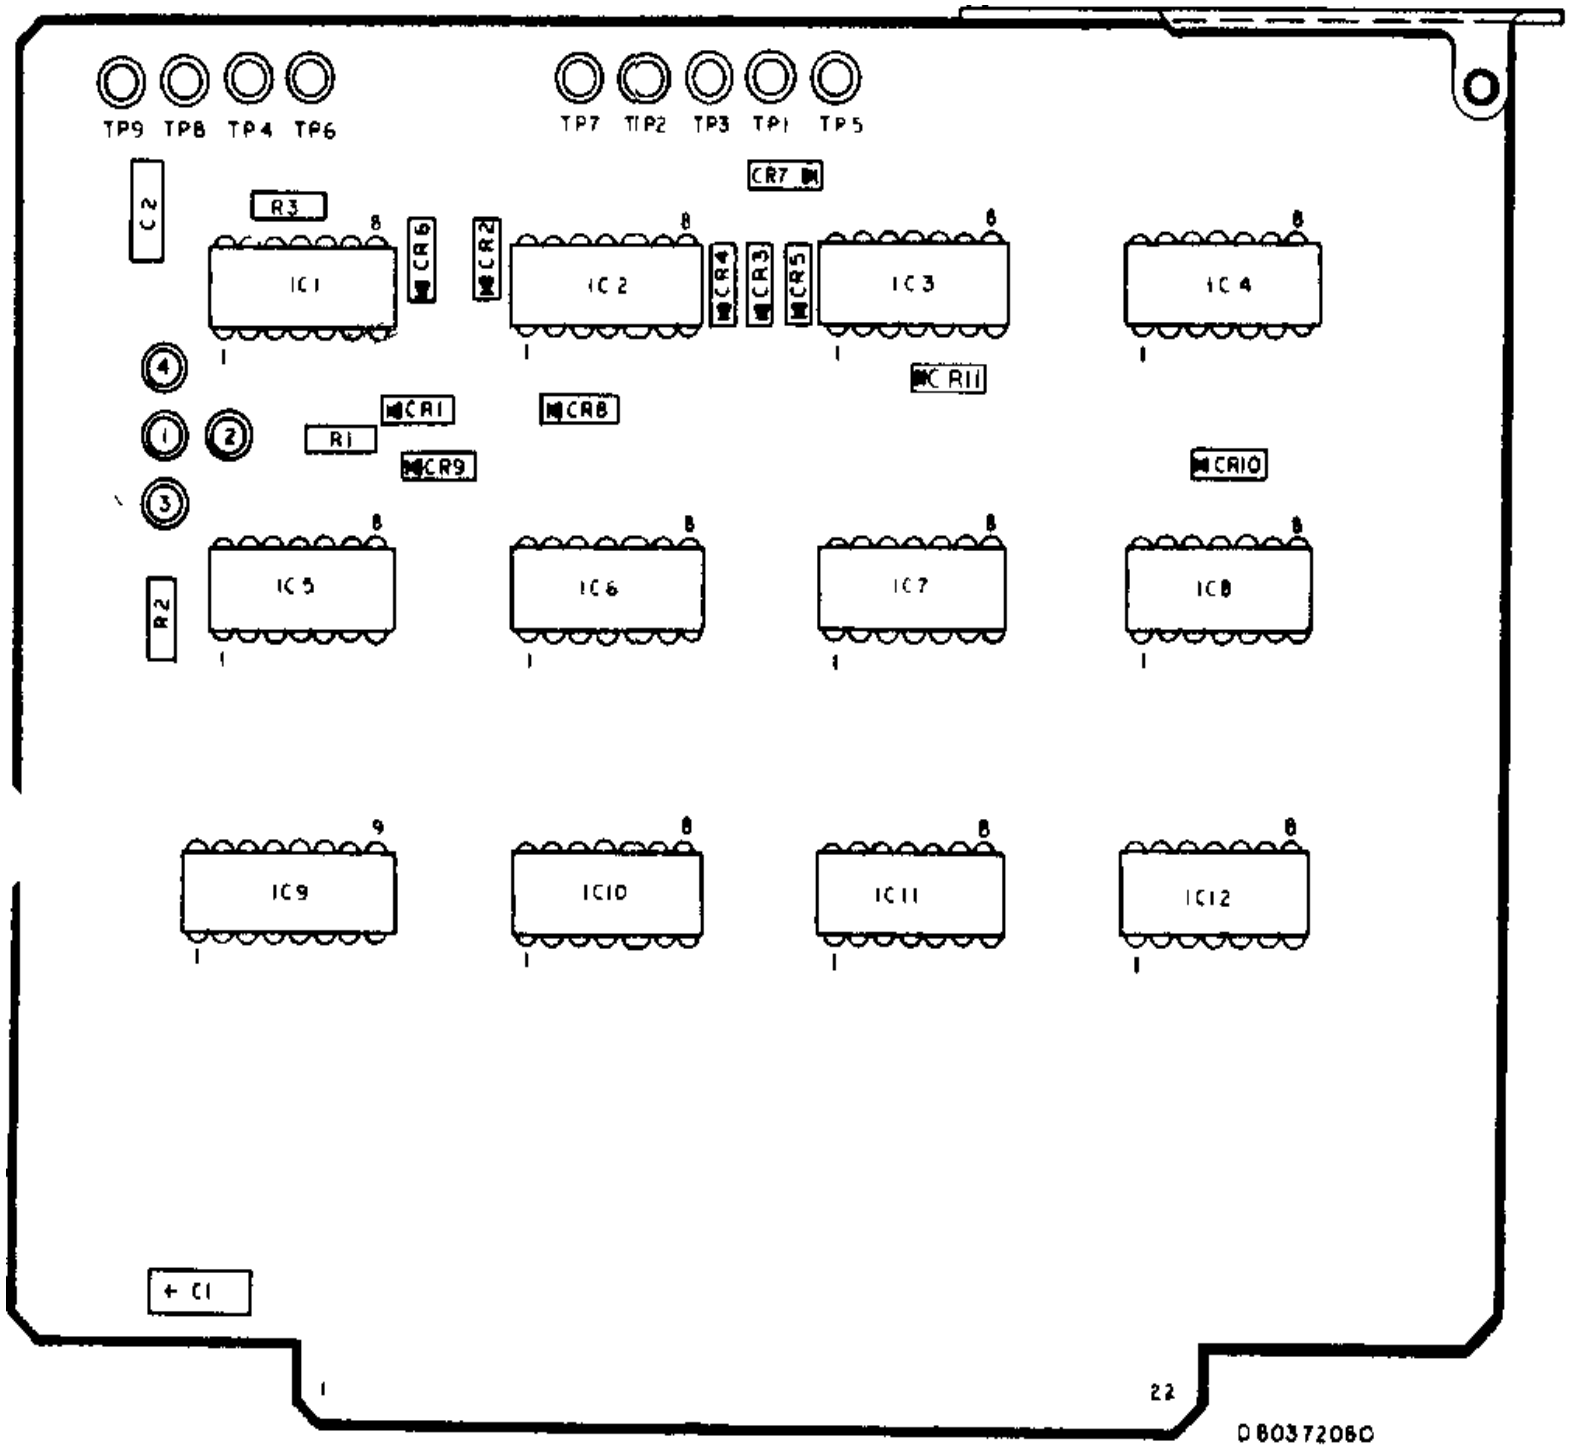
Component Locations - Signal Pattern Matrix, Assembly A8
